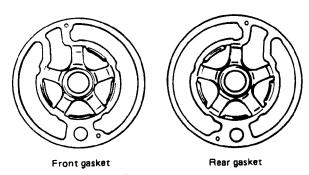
Proper Gasket Placement on Rear Valve Plate
